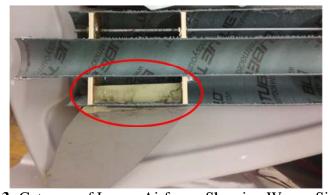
Cutaway of Lower Airframe Showing Wrong Size Tang
